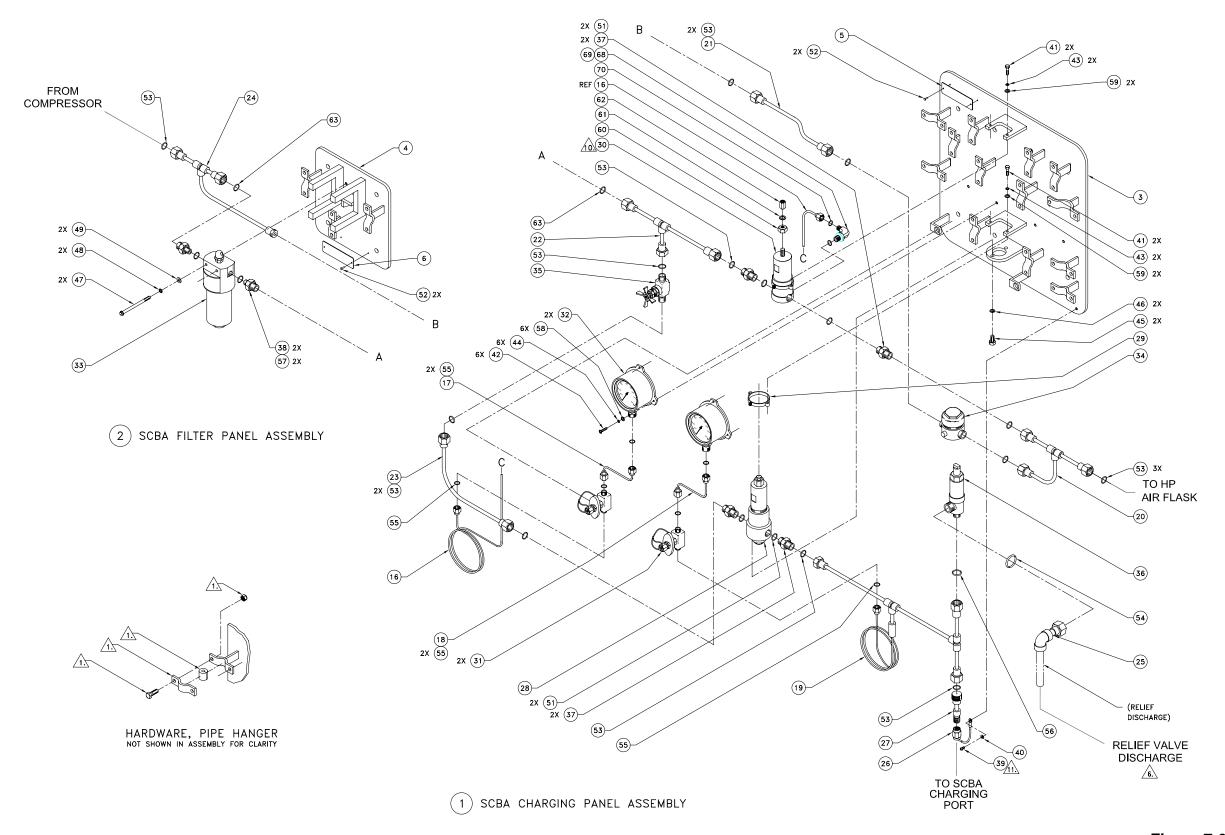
SCBA Filter Panel and Charging Panel Assemblies
